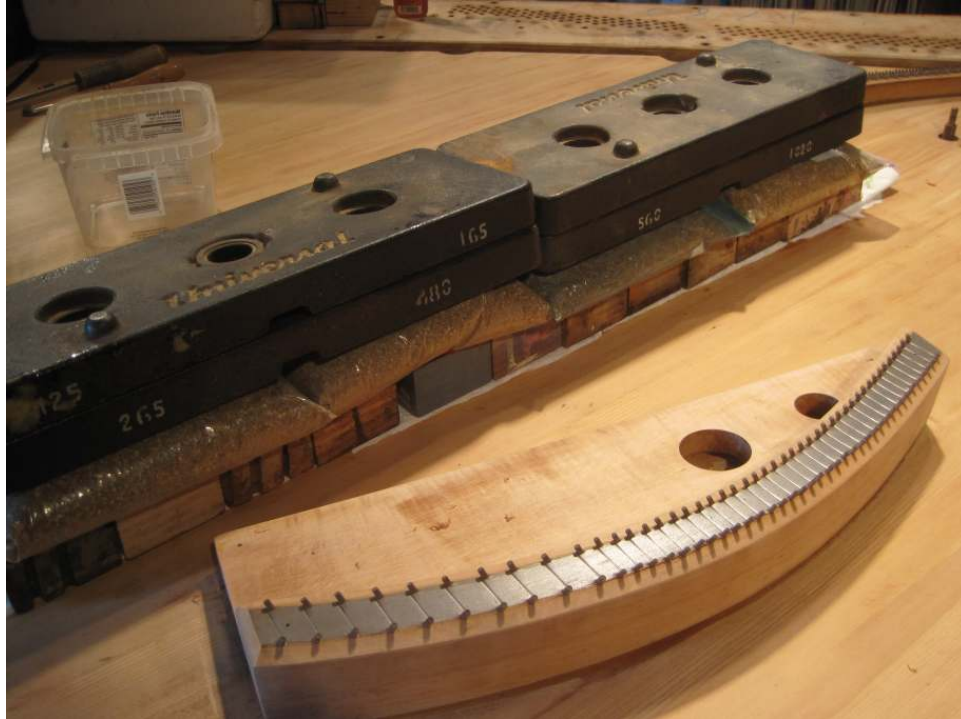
With the cracks opened, shims are glued in place, then clamped overnight with weights.
